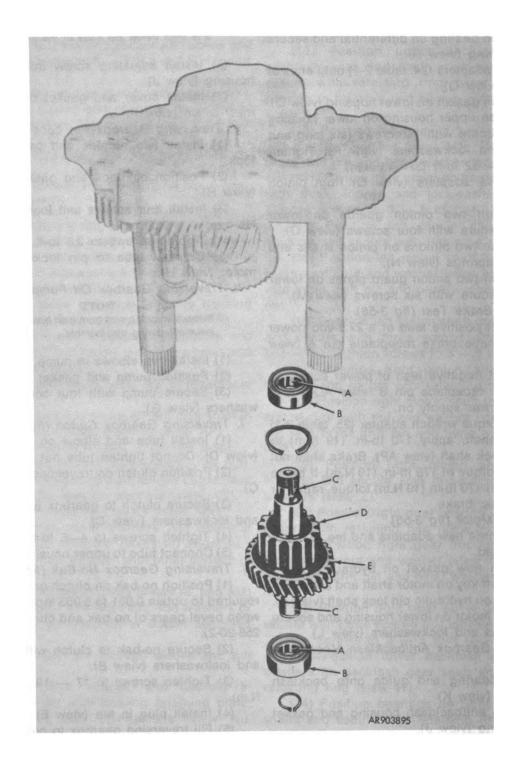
Traversing gearbox upper housing and gear train wear points (1 of 5).
